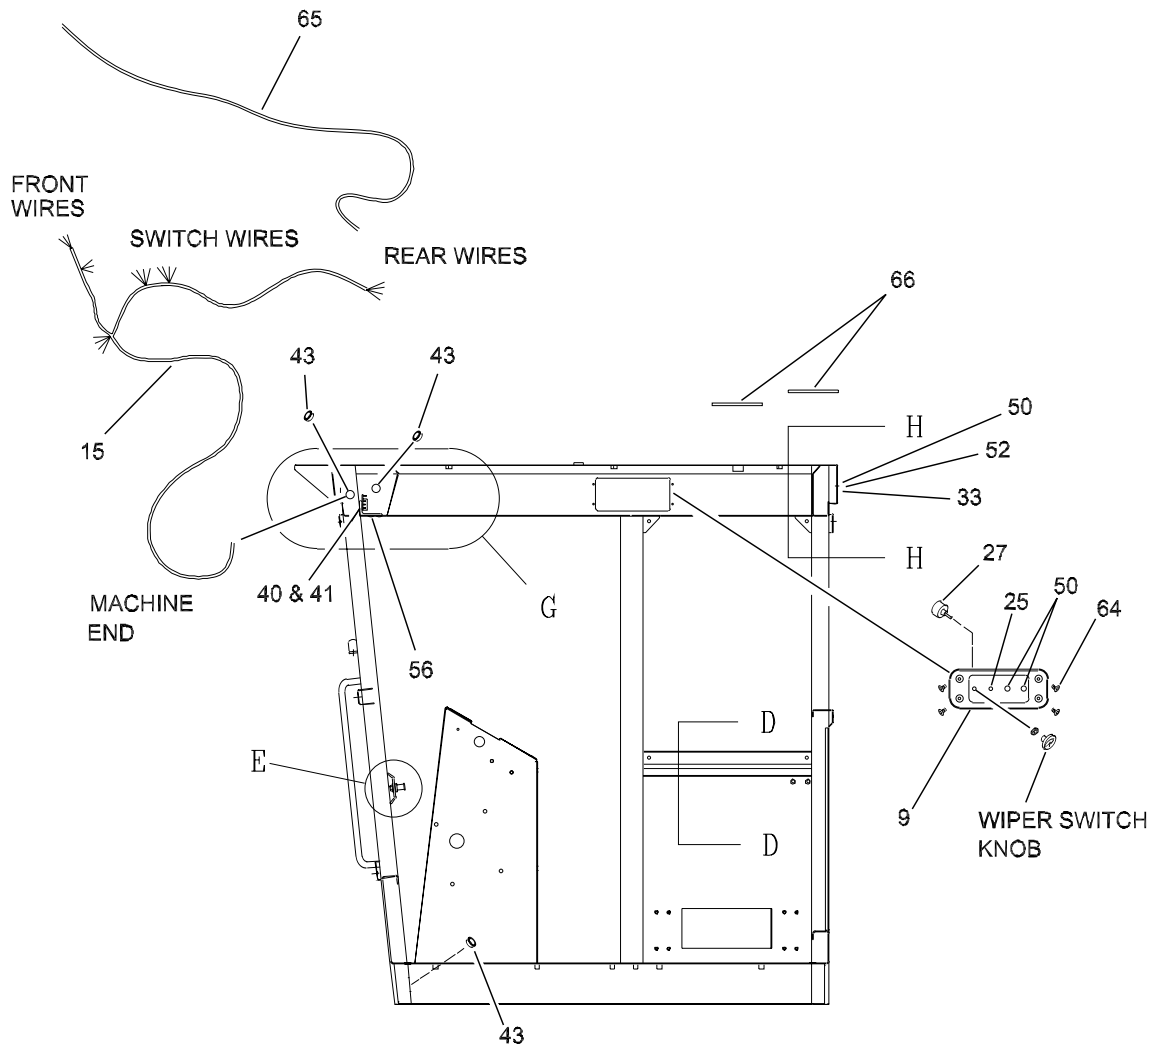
CAB ASSEMBLY (SHEET 2 OF 6)
